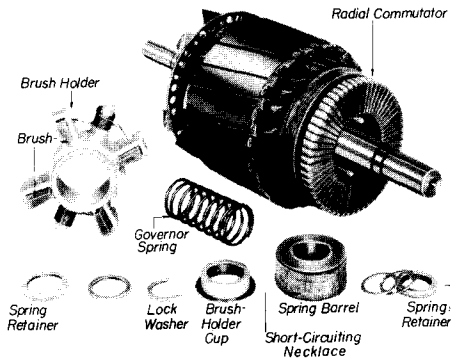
A partly dismantled rotor and parts of the centrifugal mechanism. (Wagner Electric Company.)
